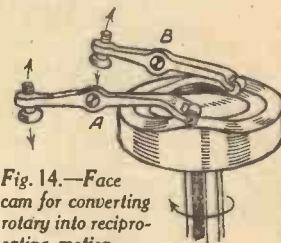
Face cam for converting rotary into reciprocating motion.
